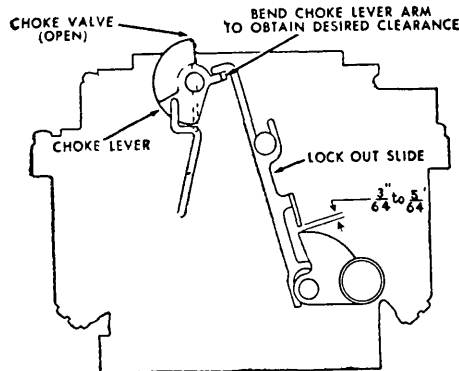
Lockout slide adjustment with choke valve open. Stromberg Series 4A
